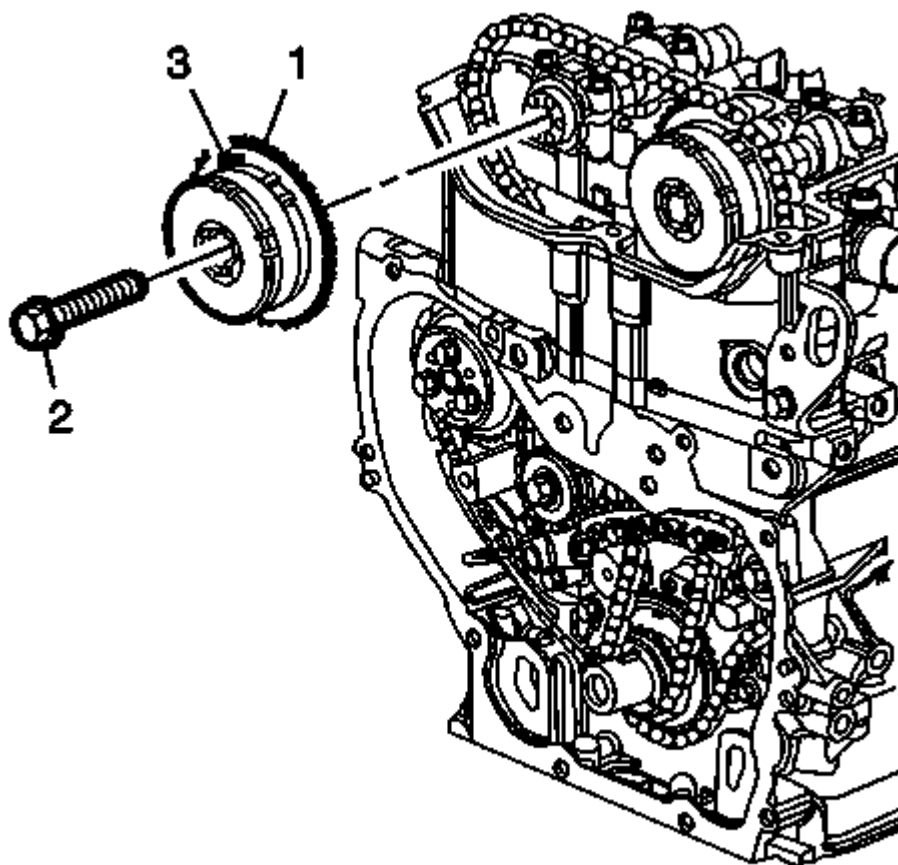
Identifying Exhaust Camshaft Actuator & Bolt
